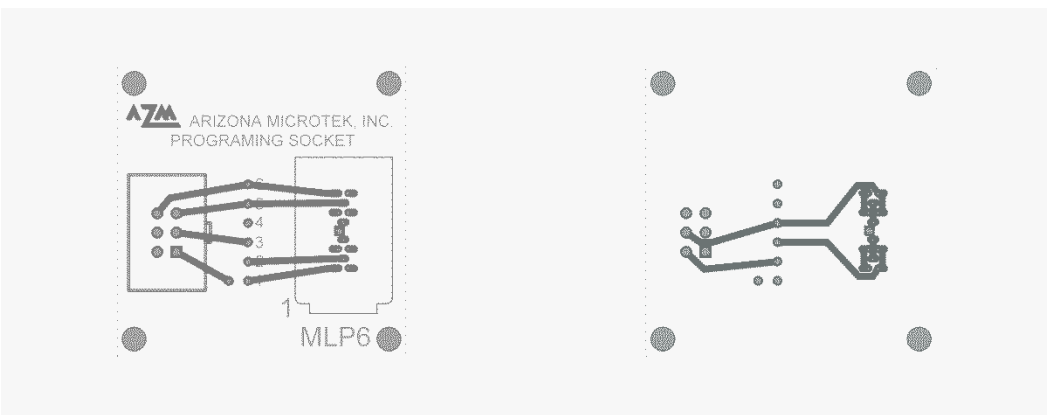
MLP6 Programming Socket Adapter Board (Top & Bottom View)
